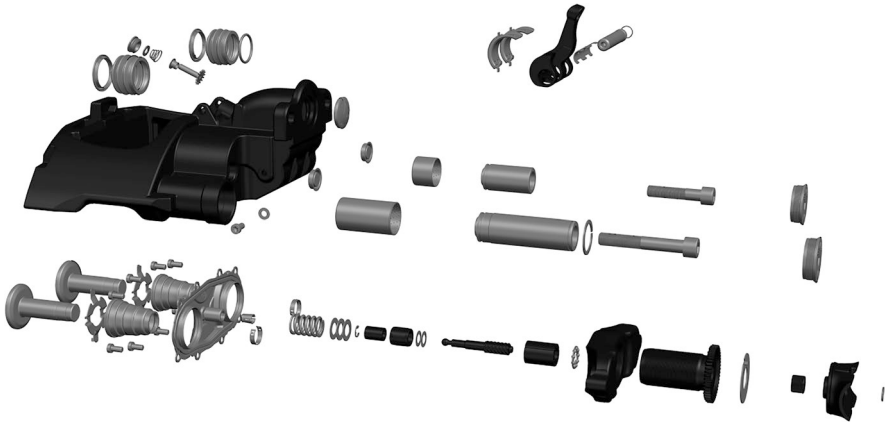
Explosive drawing of the pneumatic air disc brake of BPW TSB (Source: BPW, used with permission)
